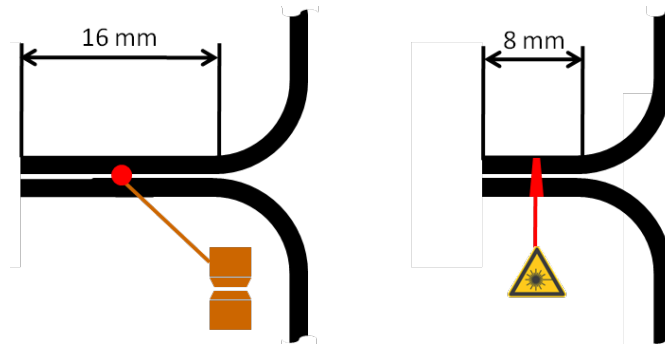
Flange width comparison spot weld (left) and laser beam weld flange
